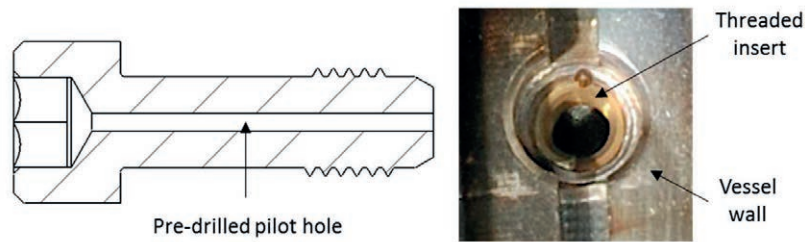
Design features to aid recovery. Left: schematic of a pre-drilled bolt. Right: photograph of a threaded insert in JET.
